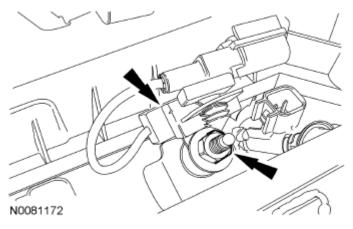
Locating Nut And Radio Capacitor Courtesy of FORD MOTOR CO.
